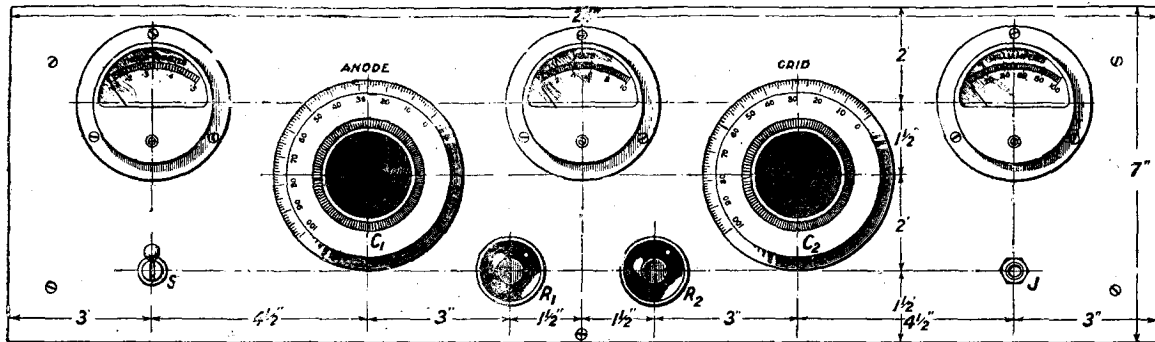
All drilling centres may be determined from this drawing provided that the same components are used. Blueprint No. 173a free.
